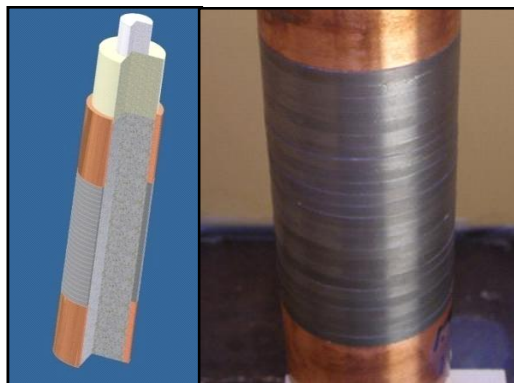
Aero 224 test article CAD drawing (left) and photograph (right)
